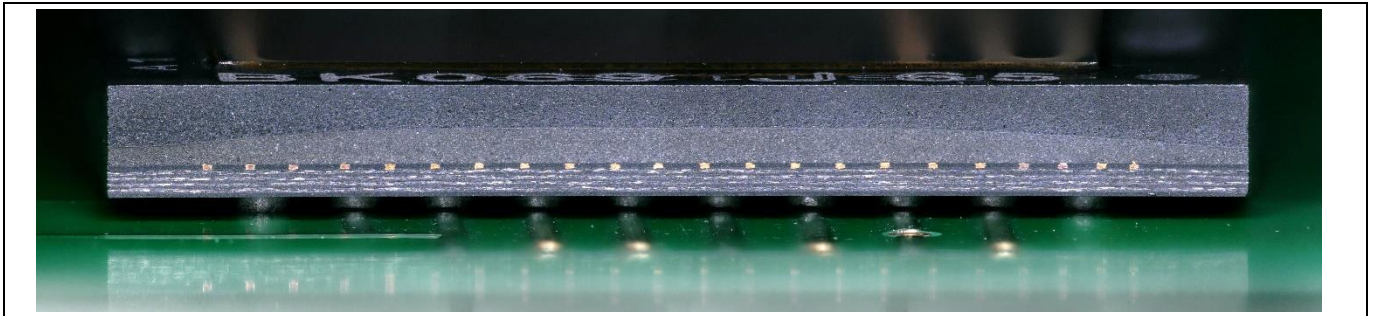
Side view of a mounted optical sensor LFBGA package. The package mold, the package substrate and the solder balls can be seen from top to bottom.
